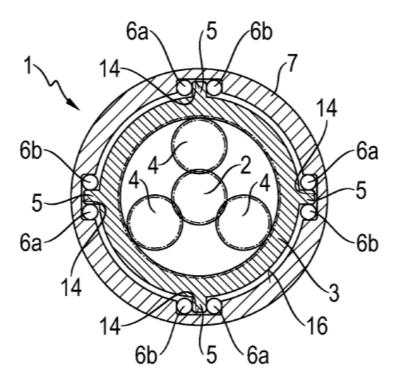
illustrates a planetary gearing with a ring gear (3) connected to casing (7) via pins (5) and roller elements (6a) and (6b), thereby allowing limited movement of ring gear (3) relative to casing (7).
